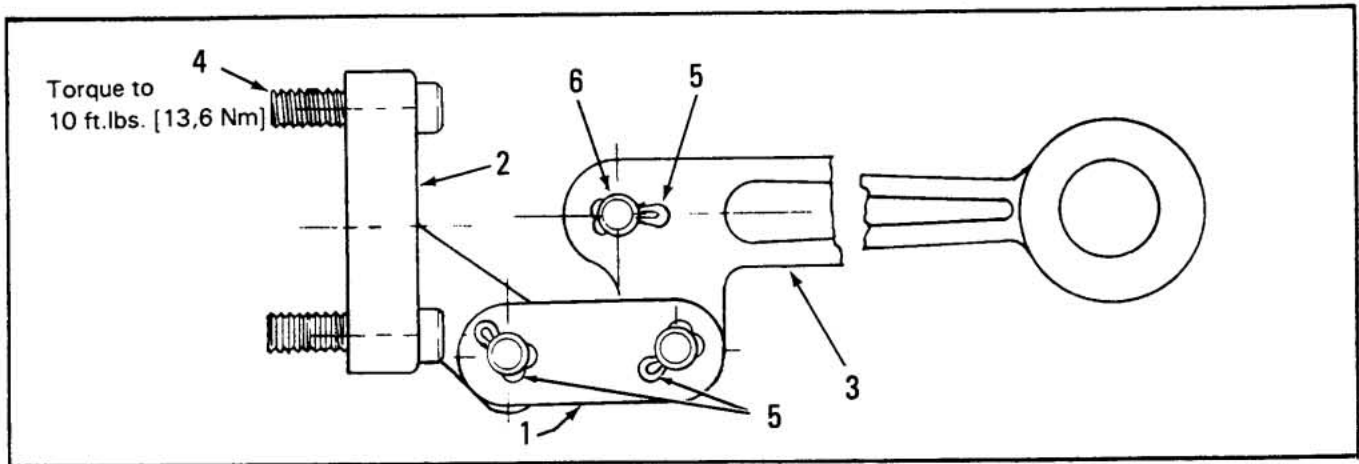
Optional Horizontal Handle and Bracket Assembly.
